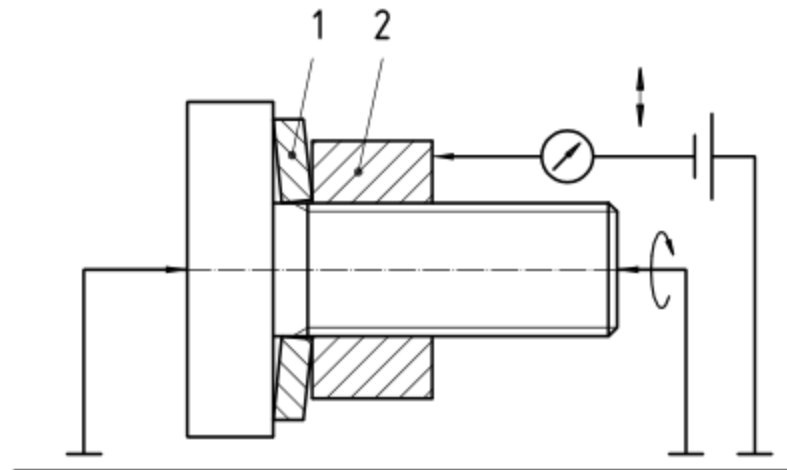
Gauge for verifying position tolerance specified in Figures 76 and 78
